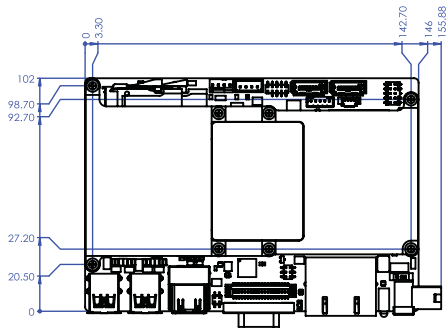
MIO-5391 Mechanical Drawing (with Heat Spreader)
